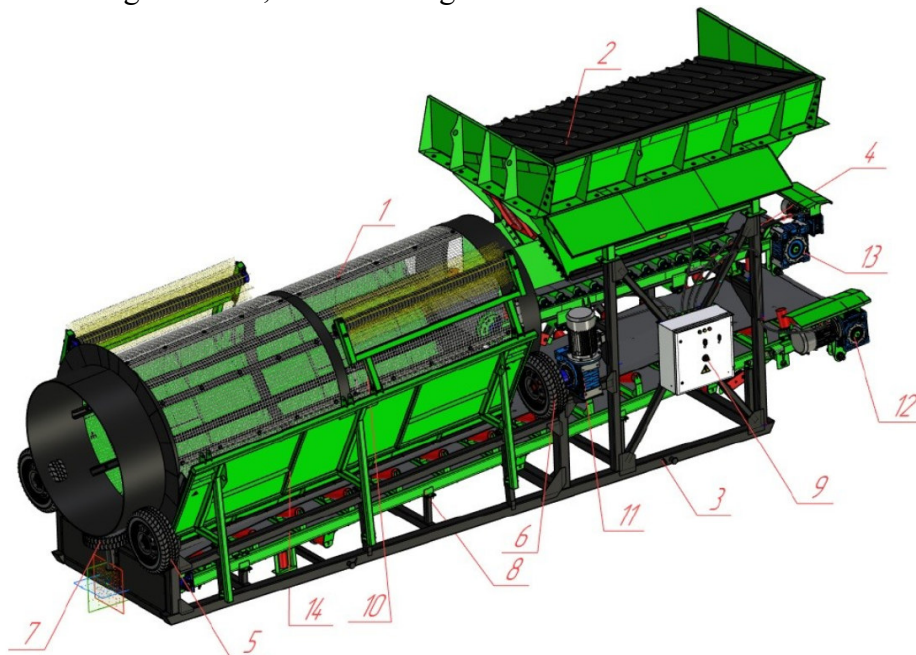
Drum screen: 1 – drum, 2 – hopper with platform vibrators, a gate valve and a grate, 3 – frame, 4 – feeder conveyor with belt cleaning devices, 5 – idler wheel, 6 – drive wheel, 7 – thrust wheel, 8 – sub-grid conveyor with belt cleaning devices, 9 – control cabinet, 10 – drum cleaning device, 11 – drum gear motor, 12 – belt gear motor, 14 – removable drum slides
